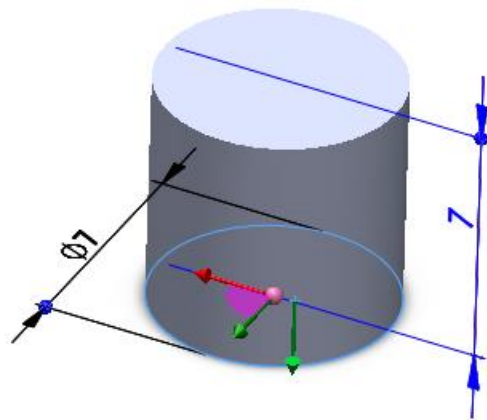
Dimensioned drawing of a cylinder (Units: mm).
